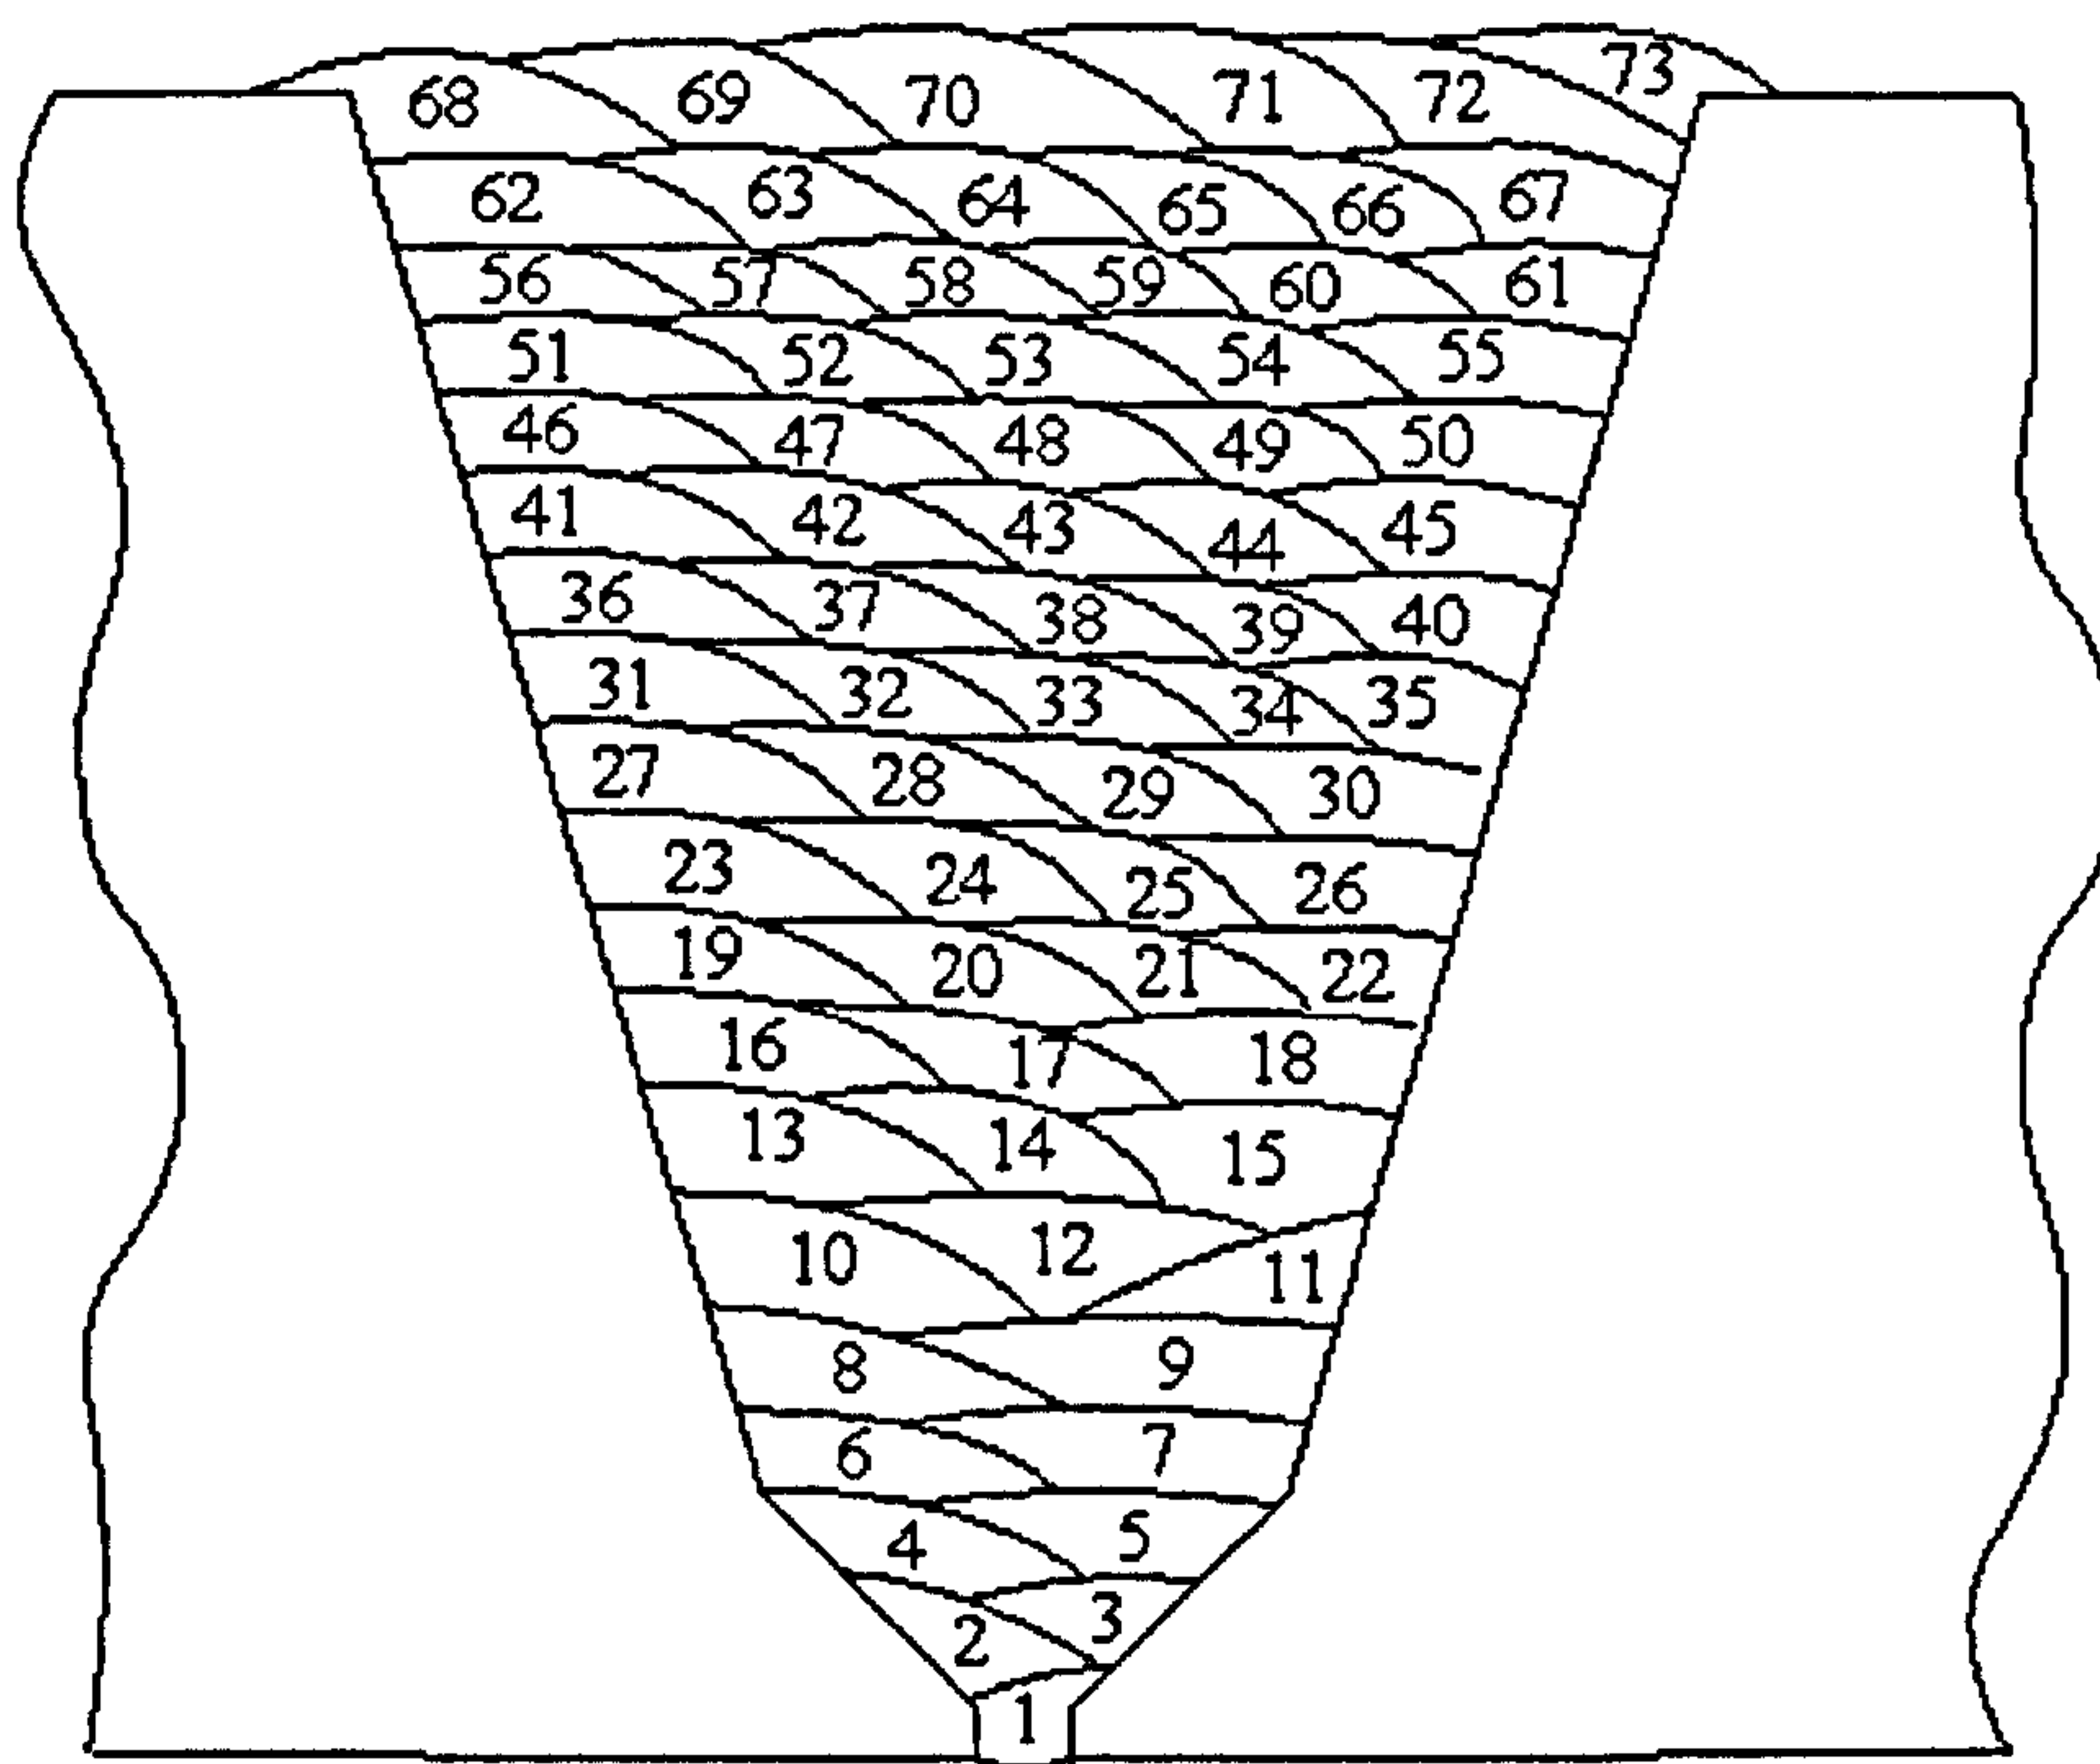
Sequence of runs in multipass butt weld.
